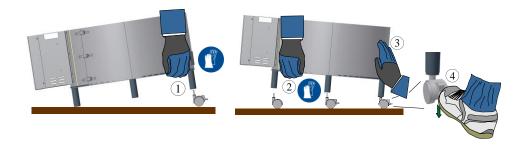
Example: Assembling castors on furnaces up to 60 kg (similar to picture)
